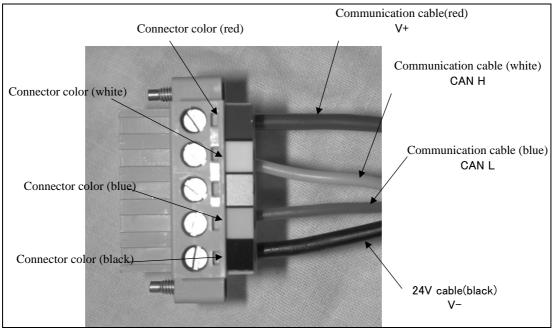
(n) Connection of ROBOWELD iC/E (Invertec CV350-R) (1/2)
